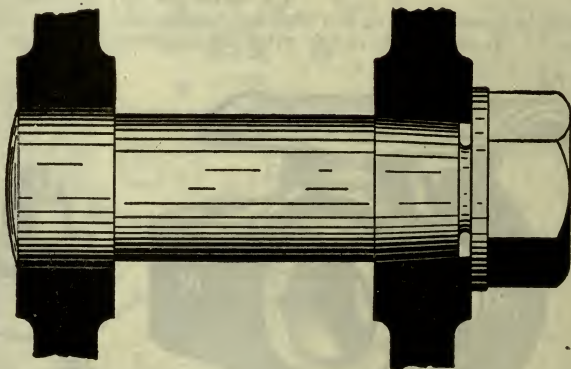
Wrist pin with cylindrical and tapered ends. A satisfactory method of attachment not requiring such precision in machining as when both ends are tapered.
